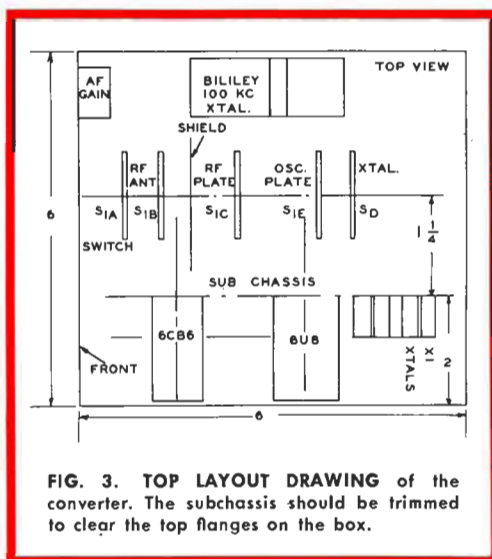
TOP LAYOUT DRAWING of the converter. The subchassis should be trimmed to clear the top flanges on the box.
